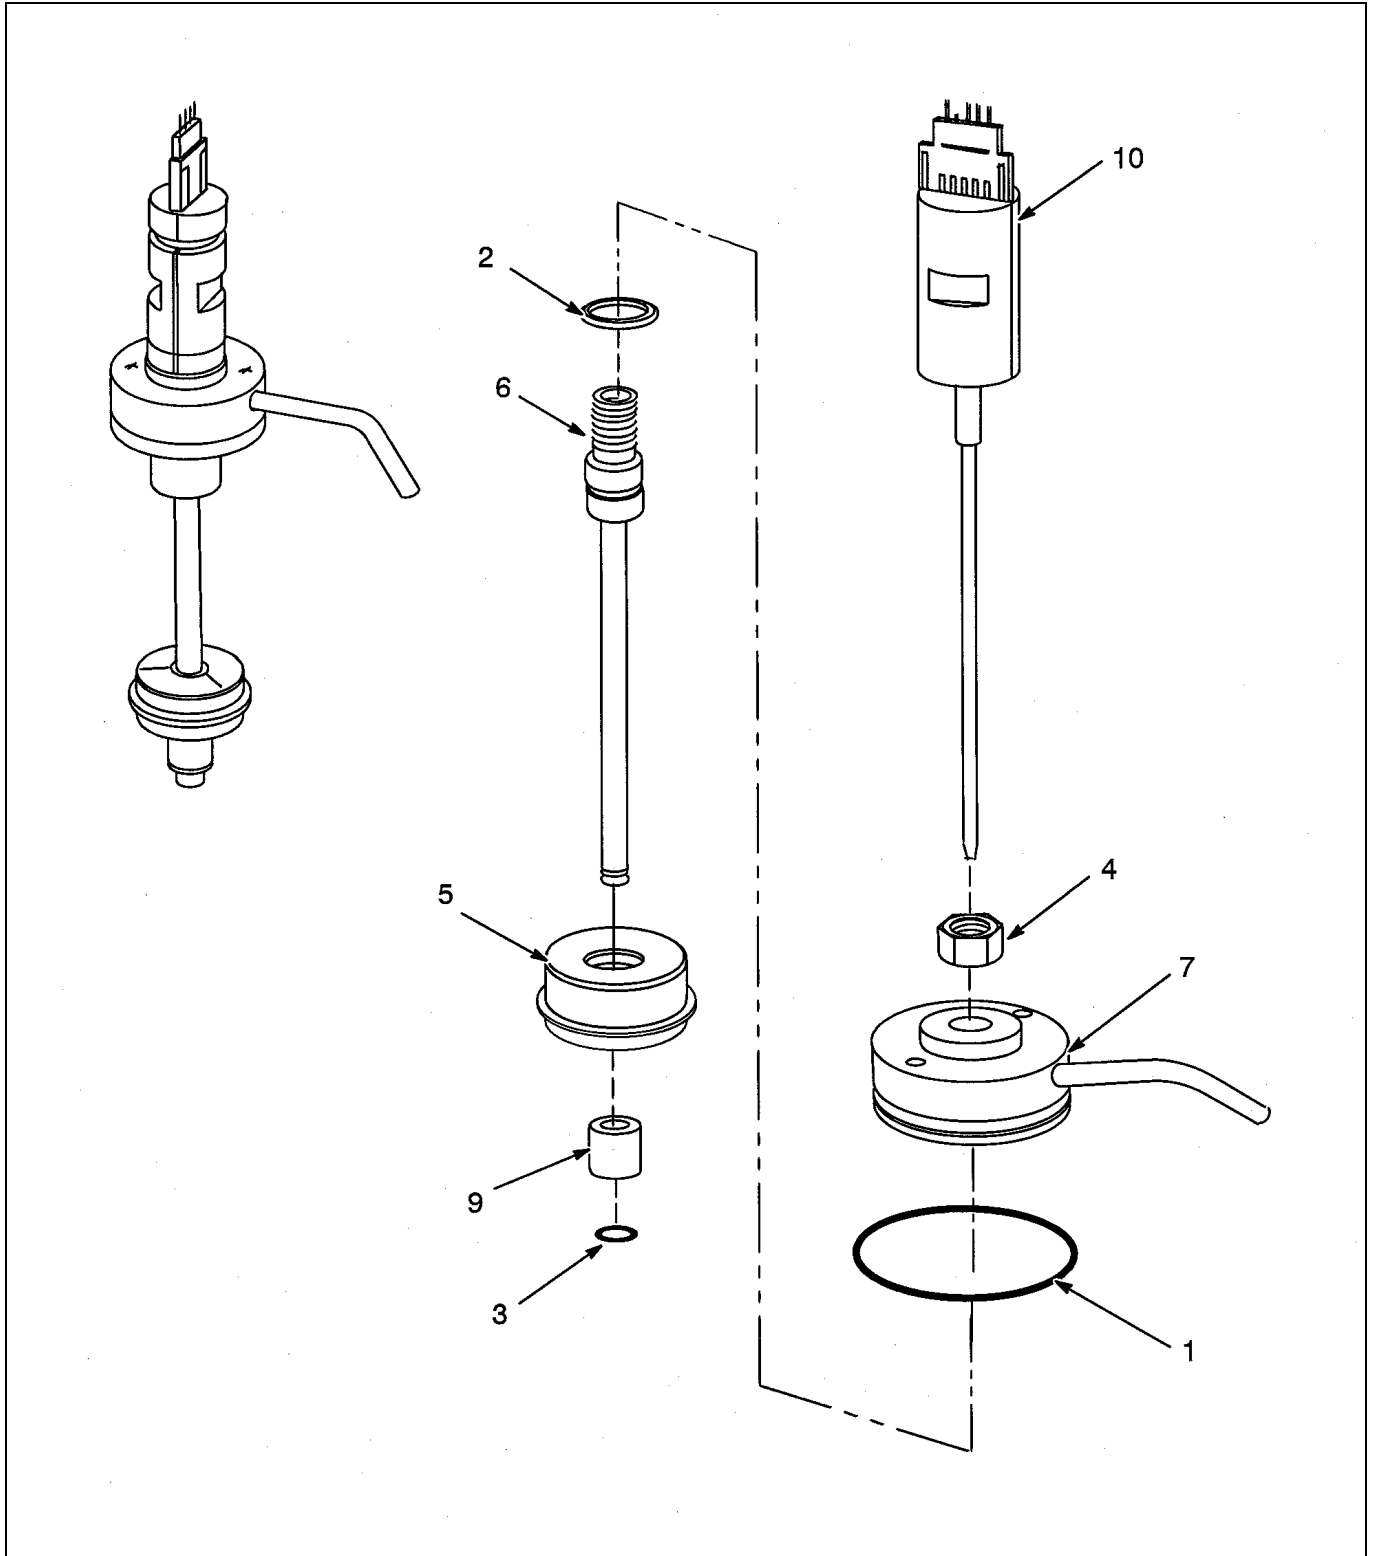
Cap and Stem Assembly (P/N SP356038)
